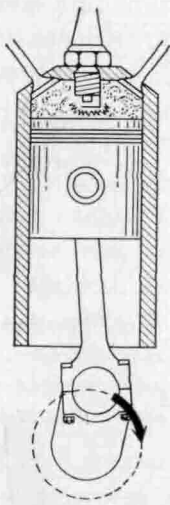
Power stroke. The ignition system produces a spark that ignites the mixture. As it burns, high pressure is created which pushes the piston downward.
